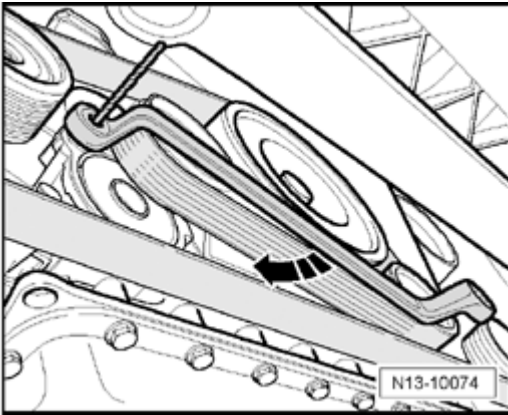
Turning Wrench Clockwise Until Tensioning Element Can Be Locked In Place
